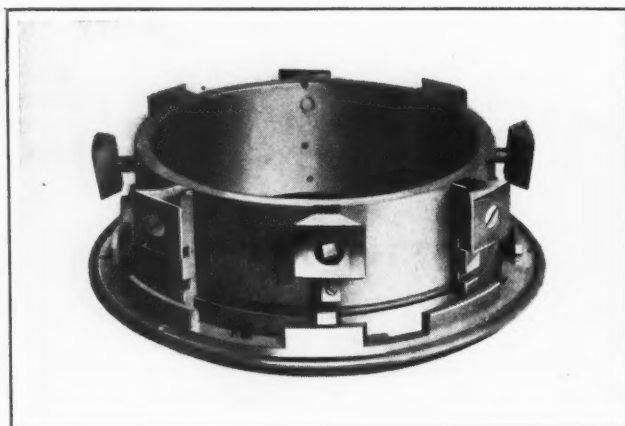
Chuck Designed to Hold Eight Abrasive Segments
